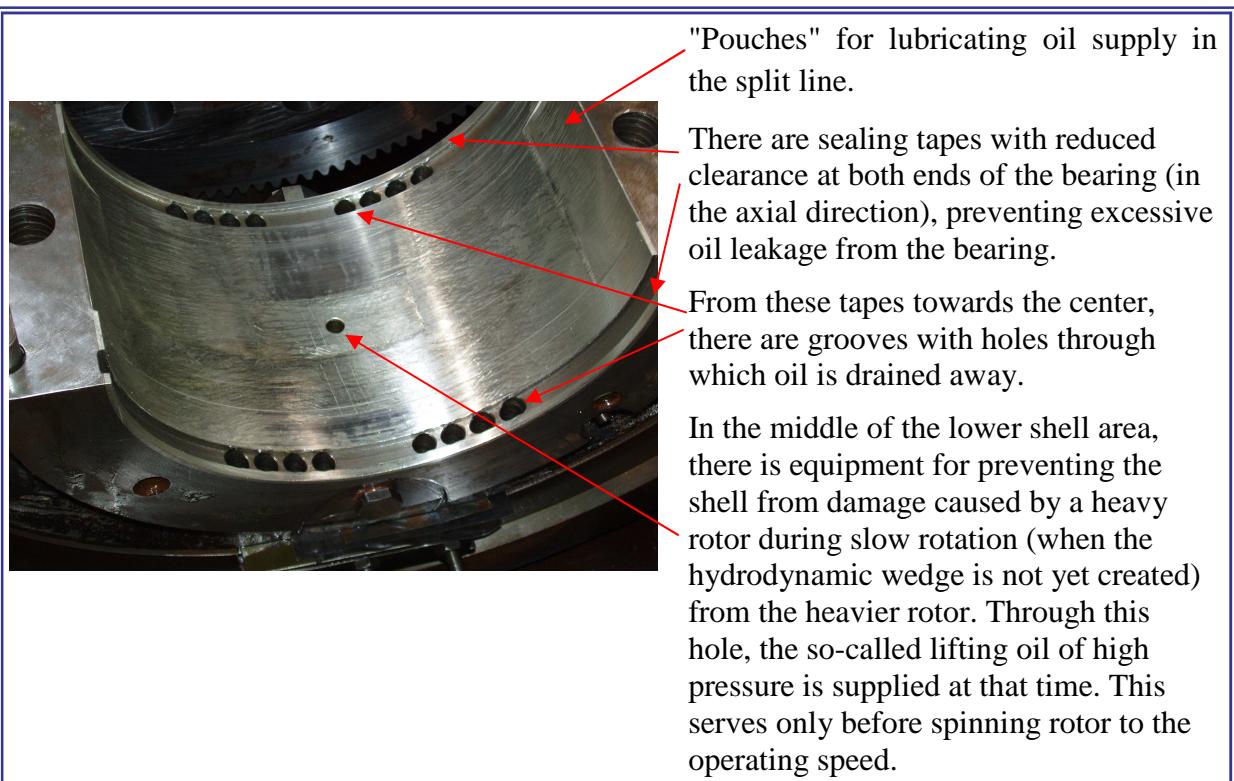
View on a Typical Lower Shell of an Elliptical Bearing
